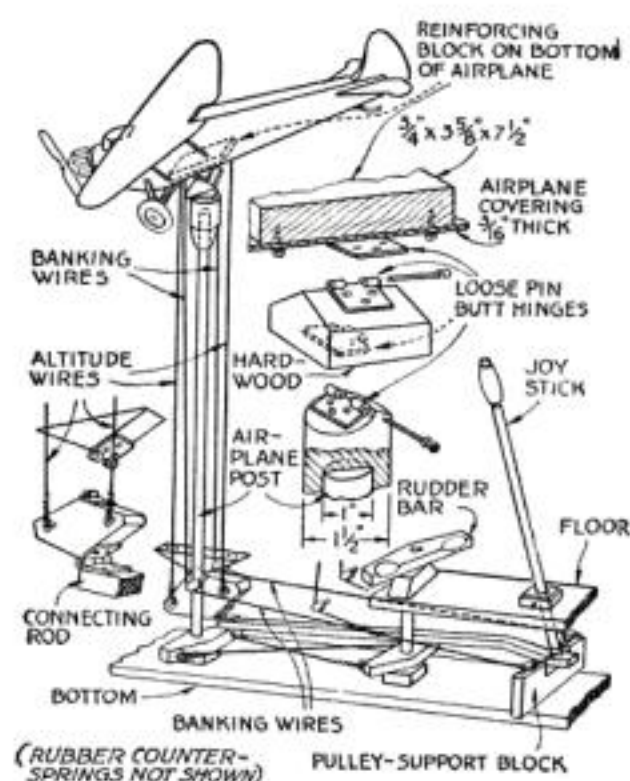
Assembly of controls and construction of the universal joint and altitude mechanism.
